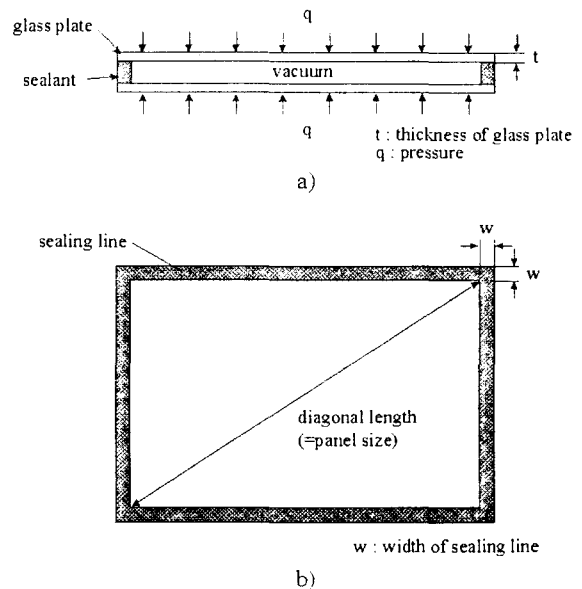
Geometric configuration of vacuum-sealed flat panel display ; a) side view, b) tip view.
